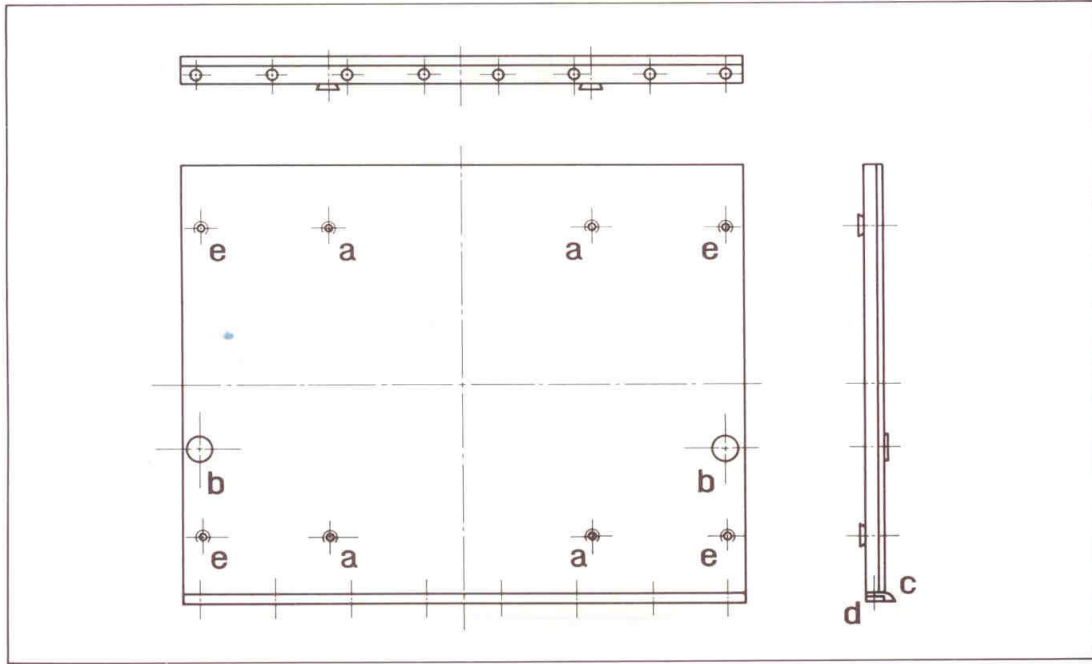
2013 DMM. STANDARD PATTERN PLATES (Assembly sketches)
